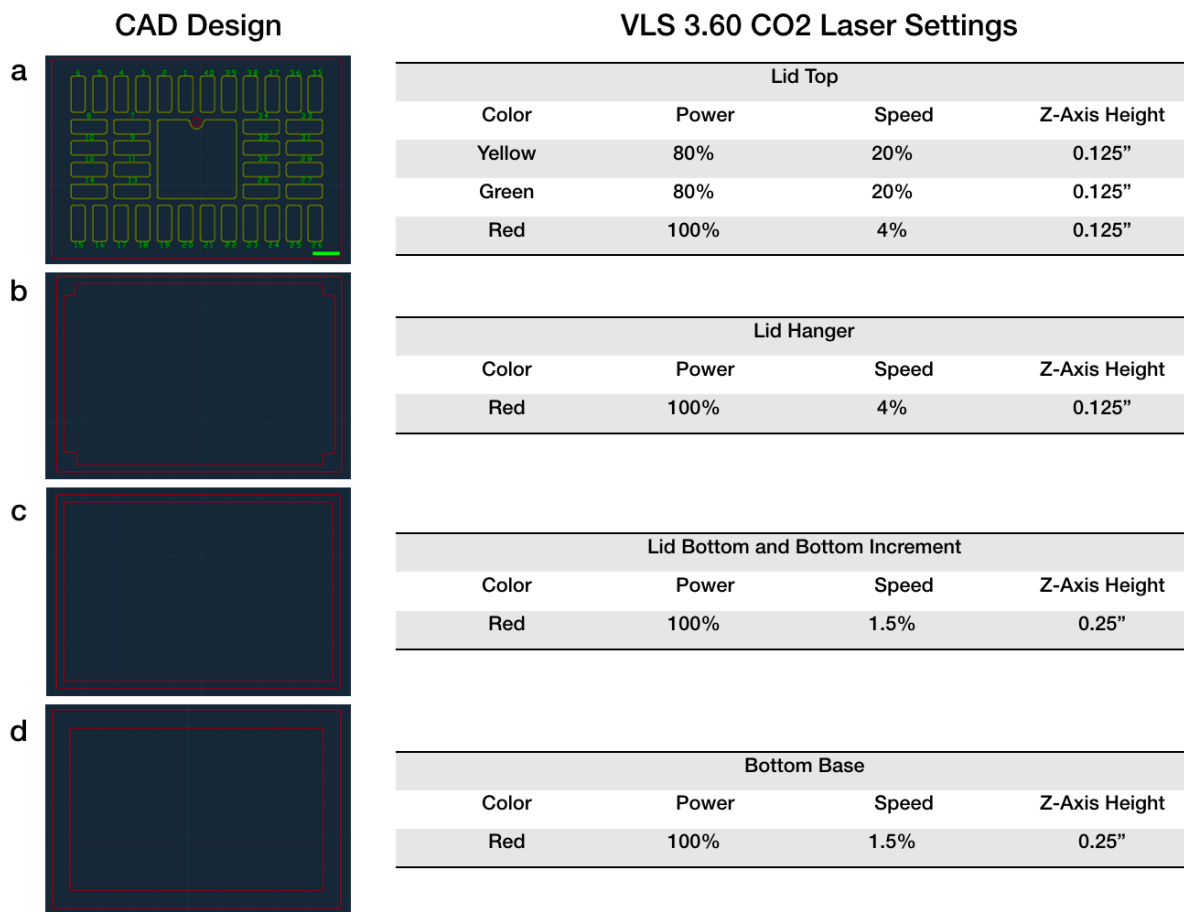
CAD Design and VLS 3.60 CO₂ Laser settings for lid and bottom accessories. a) CAD design and laser settings for lid top engraving and cutting. b) CAD design and laser settings for lid hanger. c) CAD design and laser settings for lid bottom and bottom increment. d) CAD design and laser settings for bottom base.
